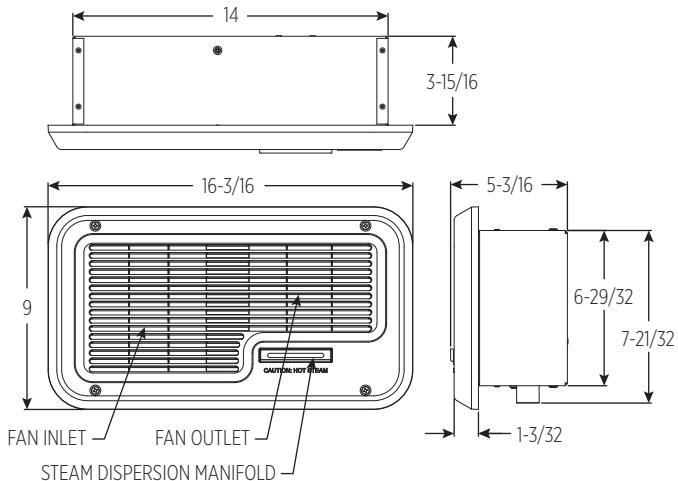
FAN PACK DIMENSIONS (INCHES)
